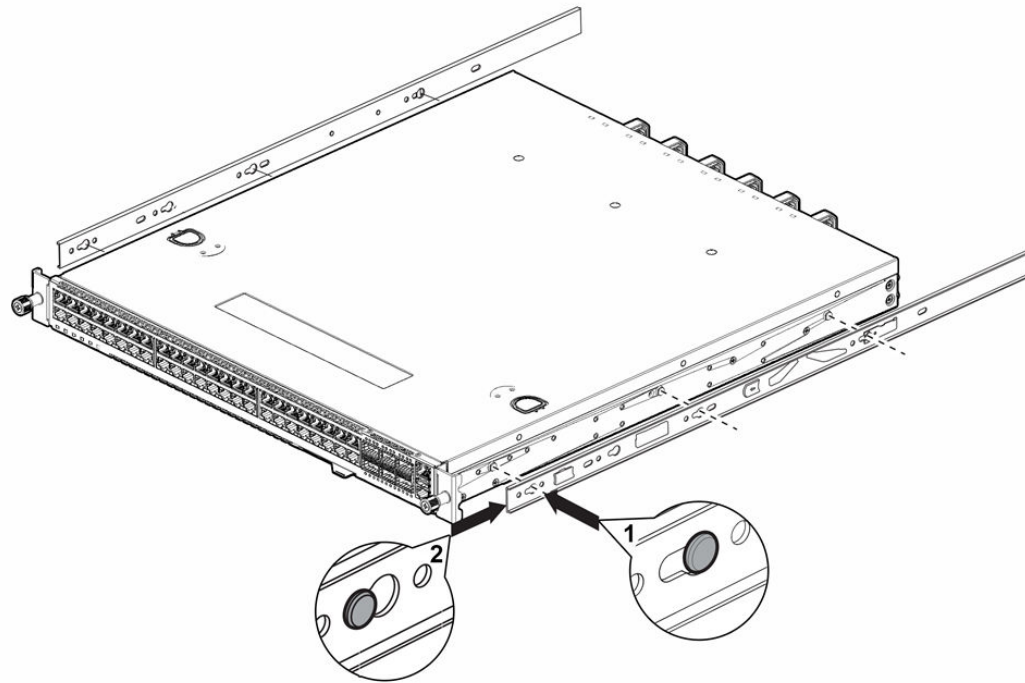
Attaching a Mounting Bracket to One Side of the Switch Housing
